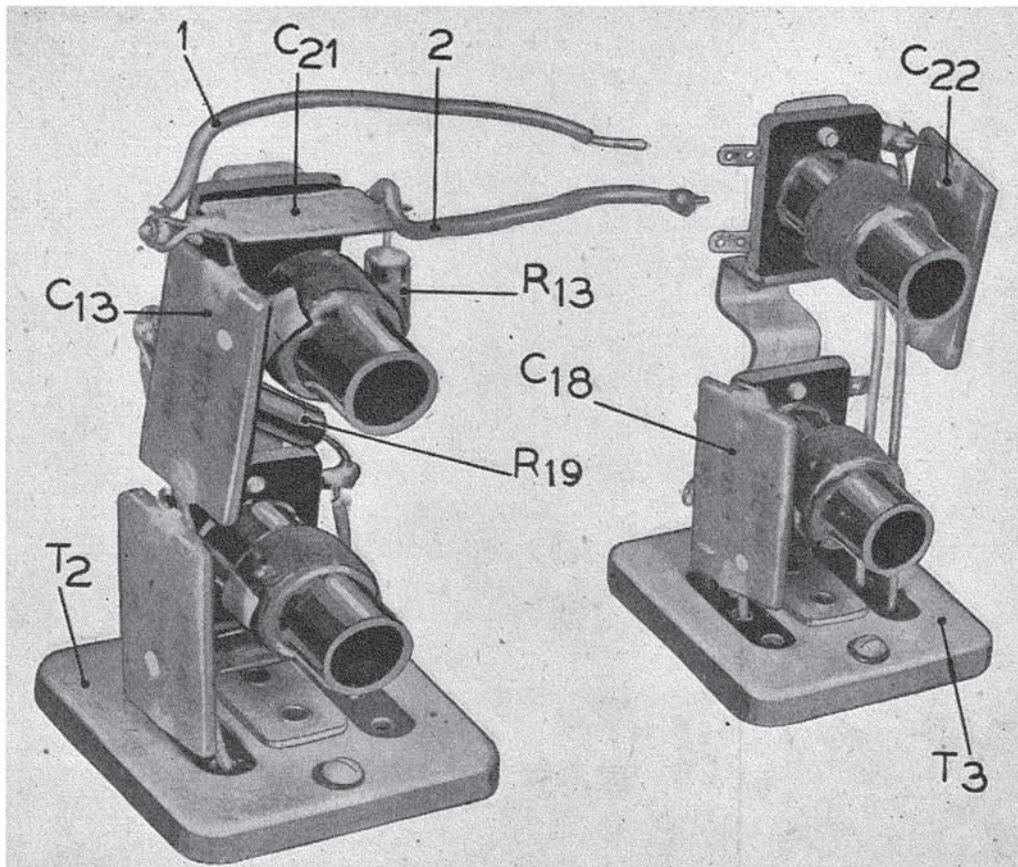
I.F. TRANSFORMERS WITH CANS REMOVED
